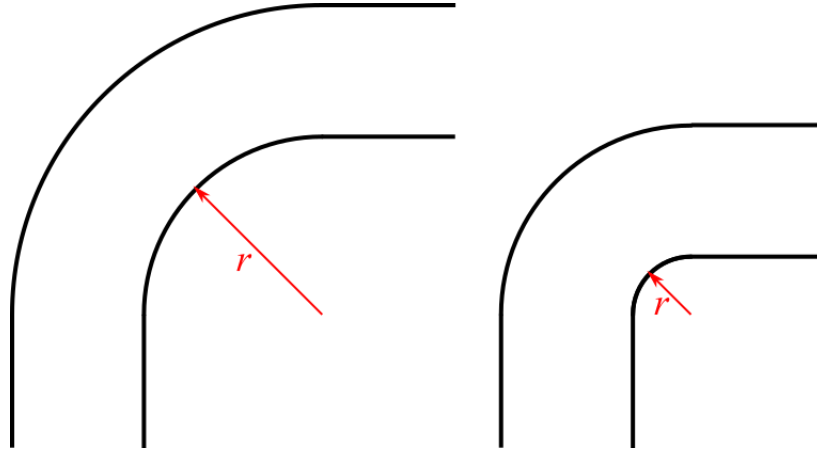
The definition of a bend radius on a pipe, showing examples of two bend radii.
